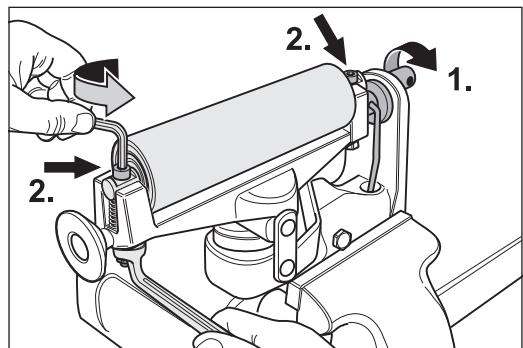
Turn the crank in the indicated direction (1.). Unscrew the two screws in the tensioning roller while holding on to the lock nuts with a closed mouth wrench (2.).
